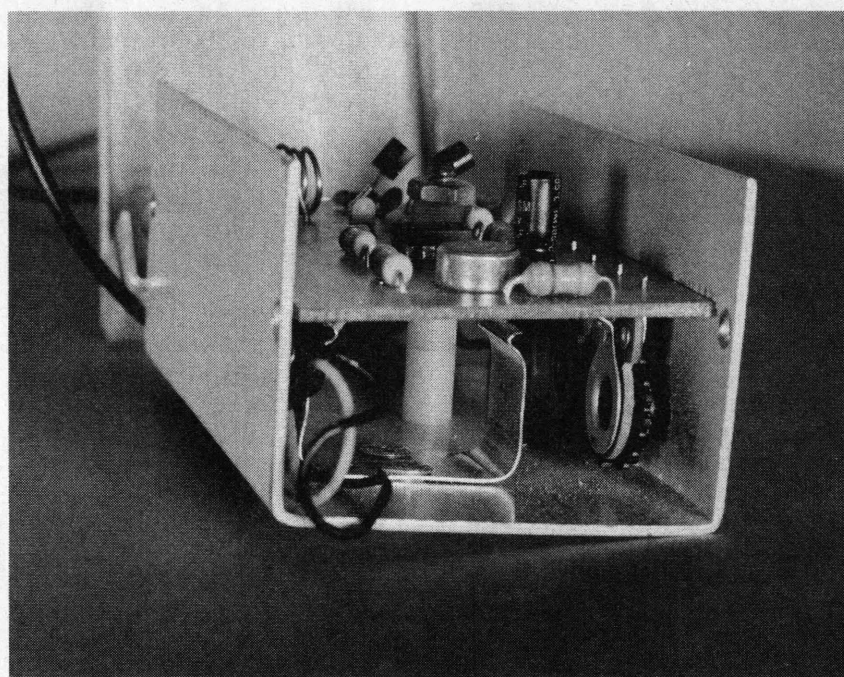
TO USE THE METAL CASE, the PC board must be cut between the two "CUT A" points indicated in Fig. 6, and the potentiometers must be mounted on the underside of the board.
